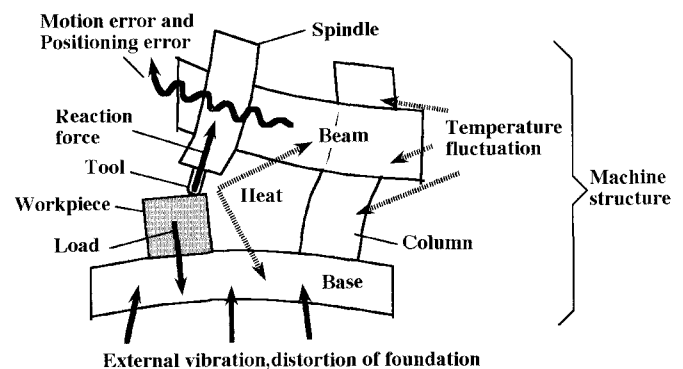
Various causes of relative positioning errors between the tool and workpiece in conventional machine
